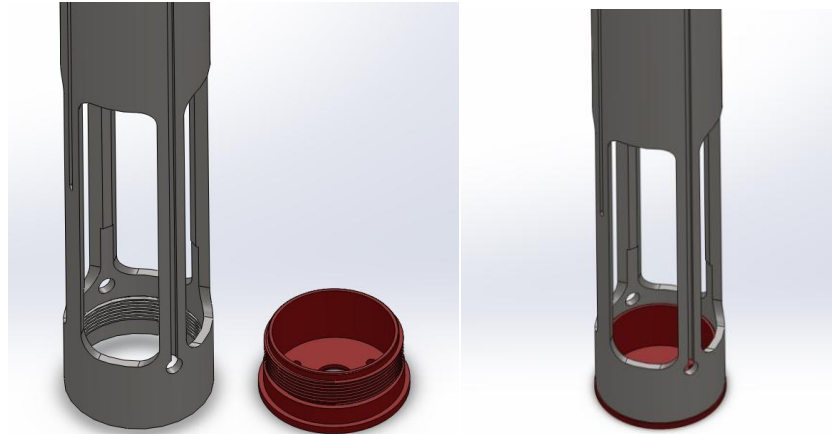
3D model of modified Economole Chassis with modified Lower Mount, coloured red, adjacent (left), and fitted (right)
